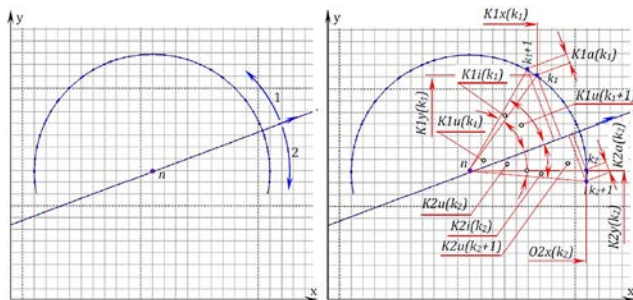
Tool-workpiece intersection: contact line and contact points from both sides of tool movement direction and respective geometrical elements
